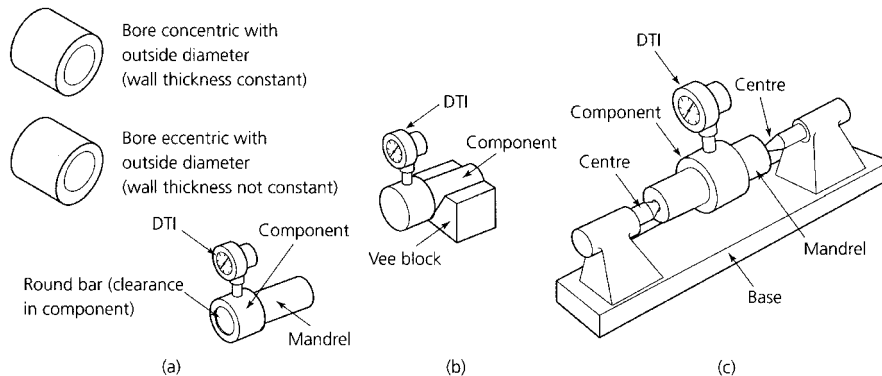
Testing for concentricity: (a) constant wall thickness; (b) solid component; (c) bored component
